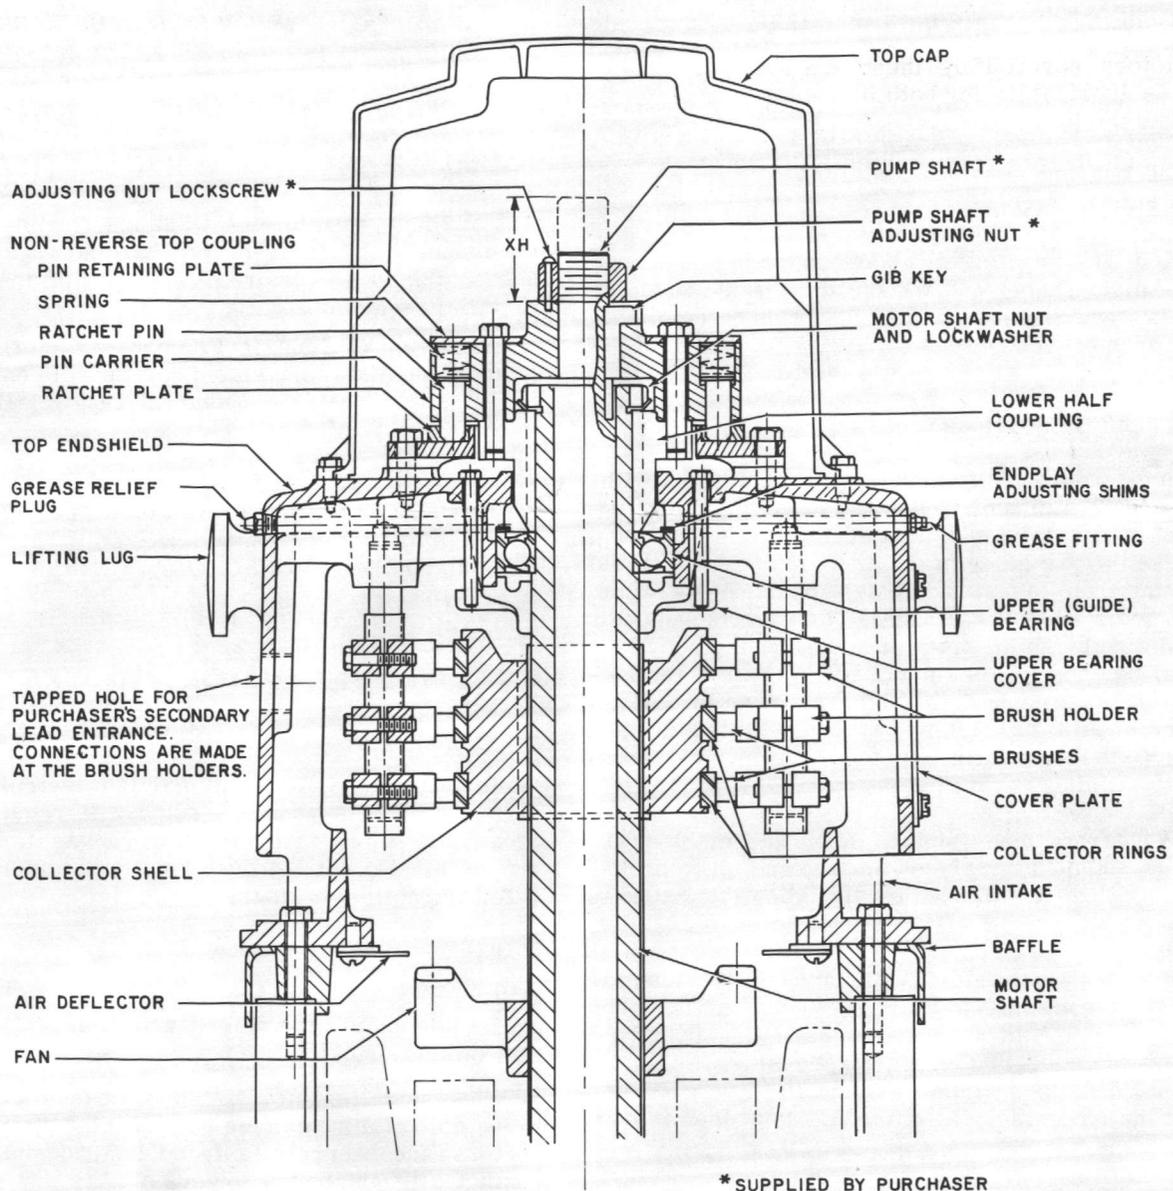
Typical wound-rotor type motor, showing rings, brushes, etc.
